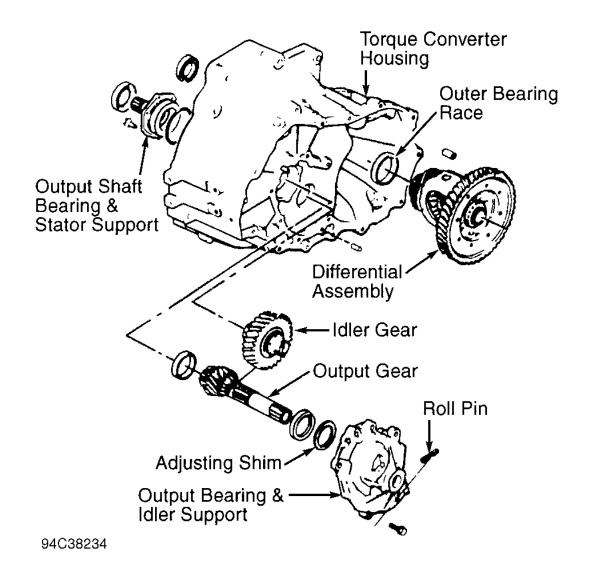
Torque Converter Housing Components Courtesy of FORD MOTOR CO.
